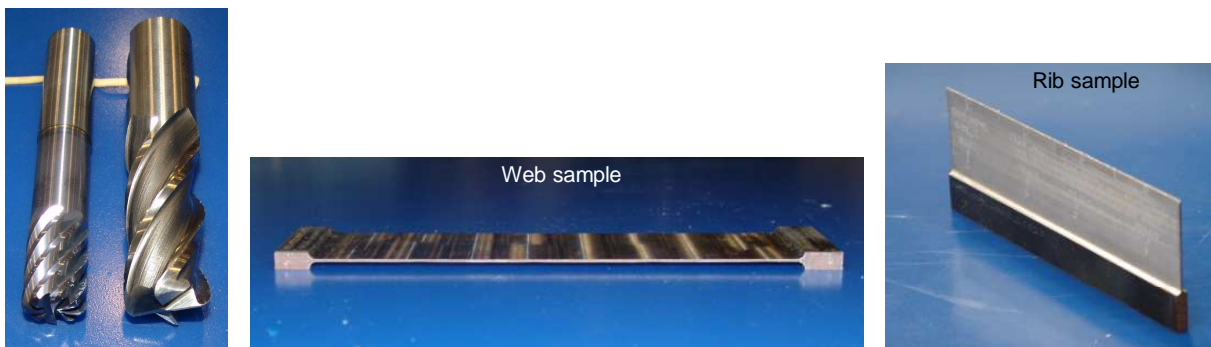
(a) Tungsten-Carbide and AISI-M-42 cutting tools; (b) Machining of subscale webs ; (b) Machining of subscale ribs.
